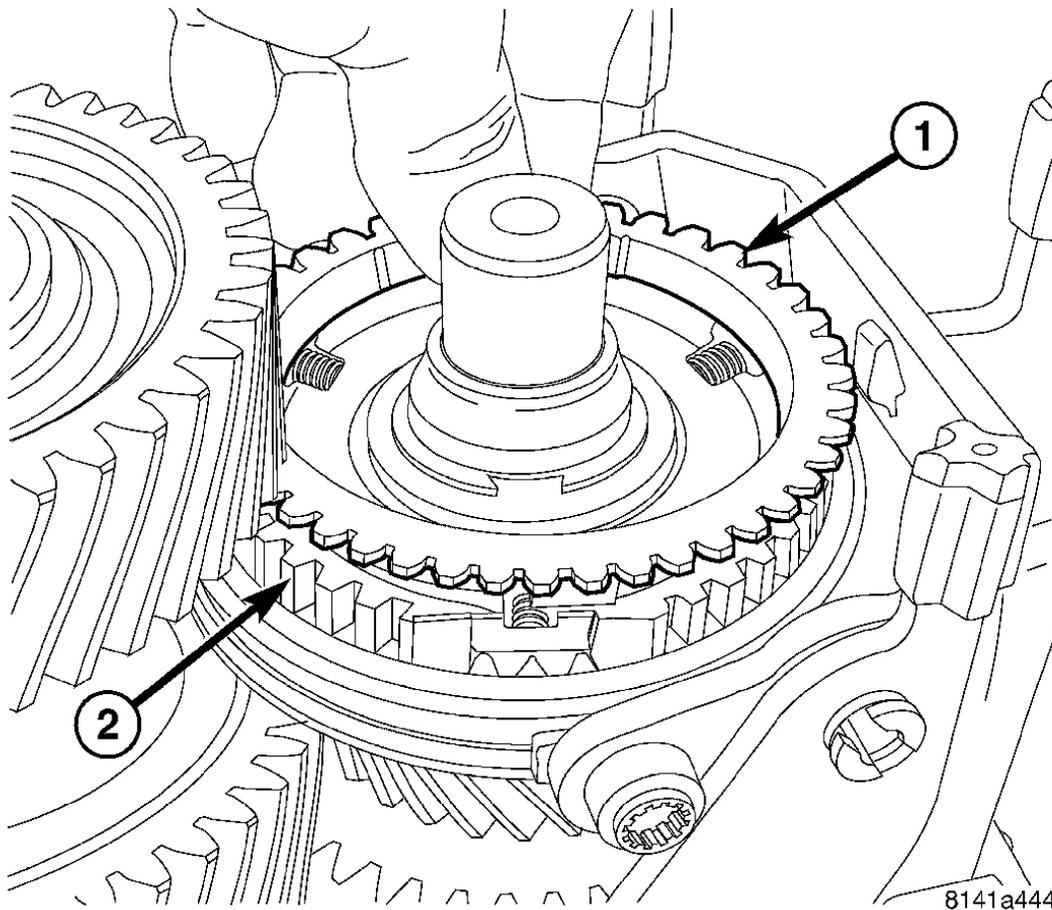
Identifying Fifth Gear Synchronizer Friction Ring & 5-6 Synchronizer Hub
